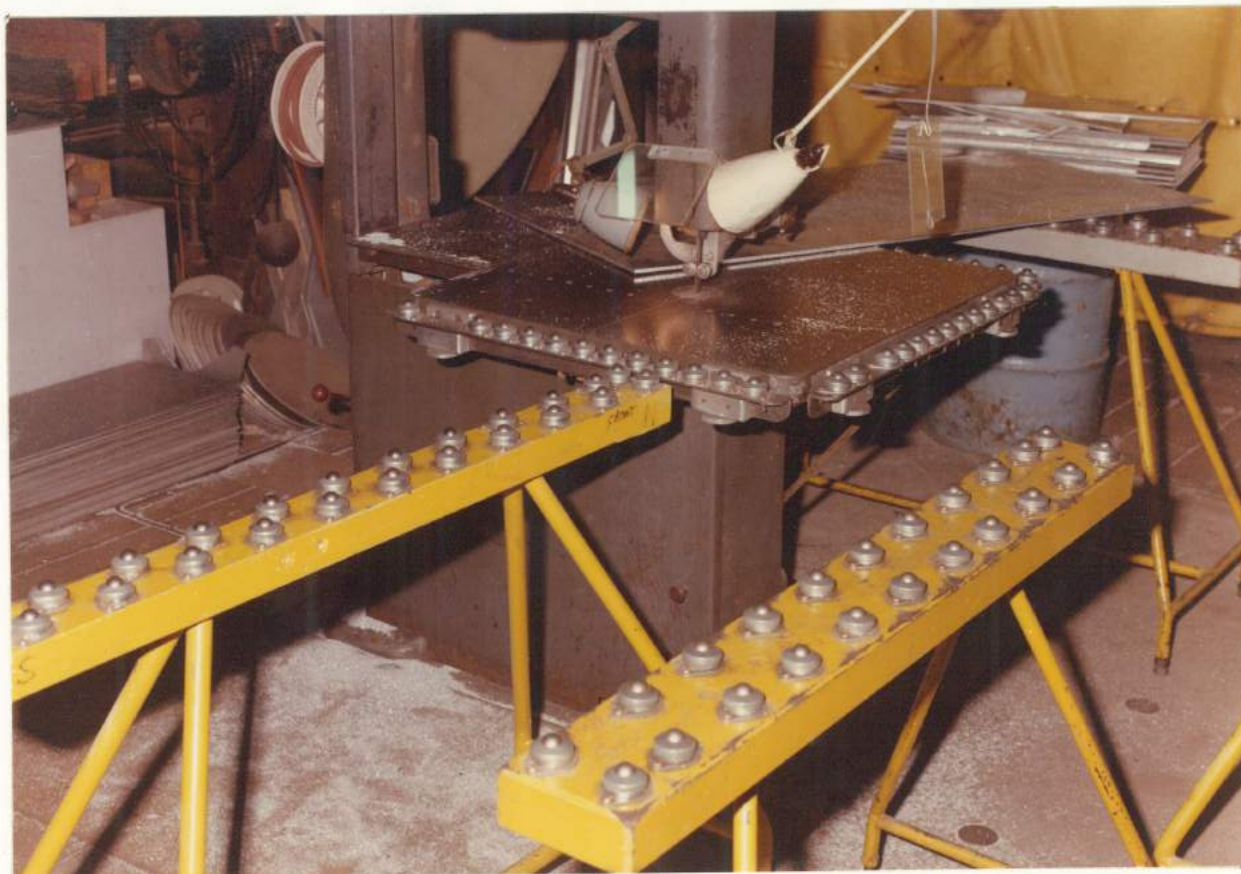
Arrangement showing Lemcol Bearings at Bandsaw Table and portable stands.
